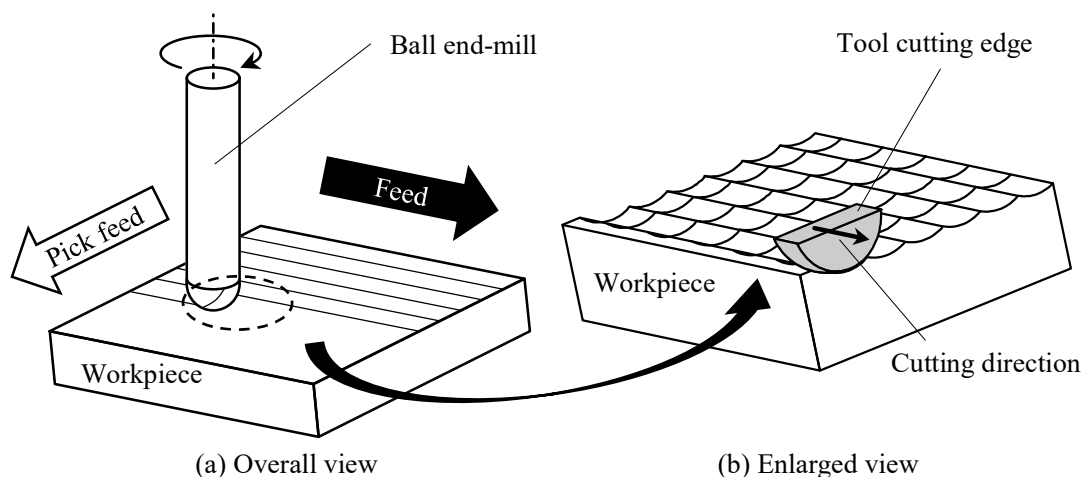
Cusp shape generation in cutting process using ball end-mill
